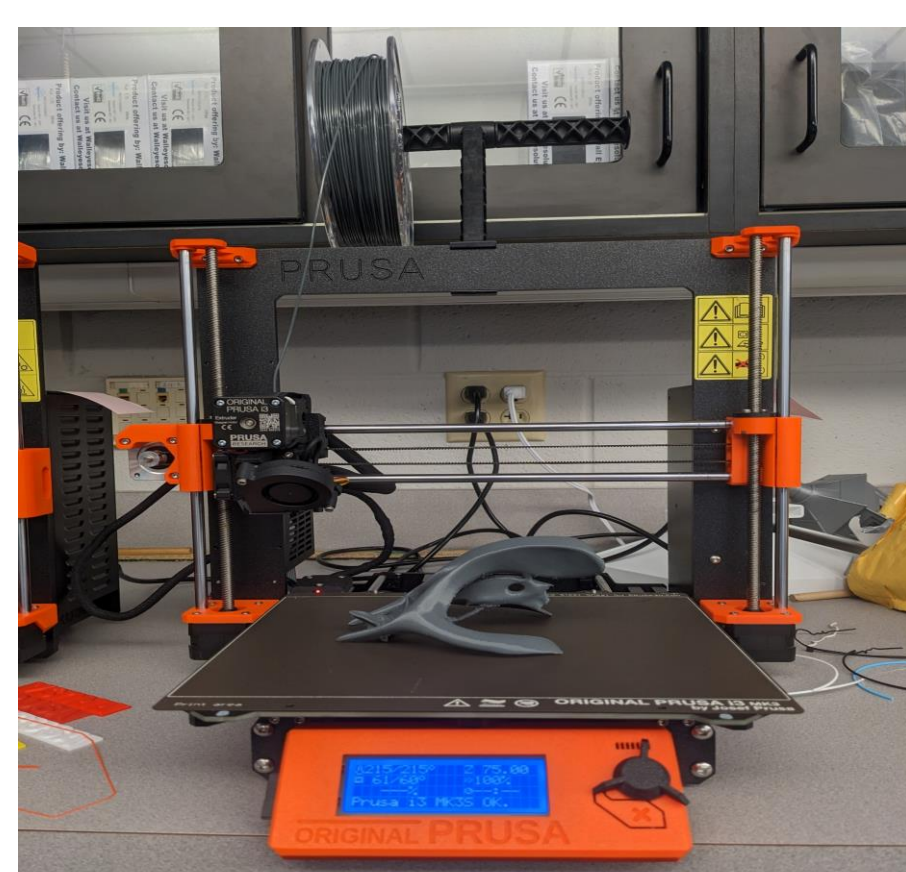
PRUSA i3 MK3S+ 3-Dimensional Printer
